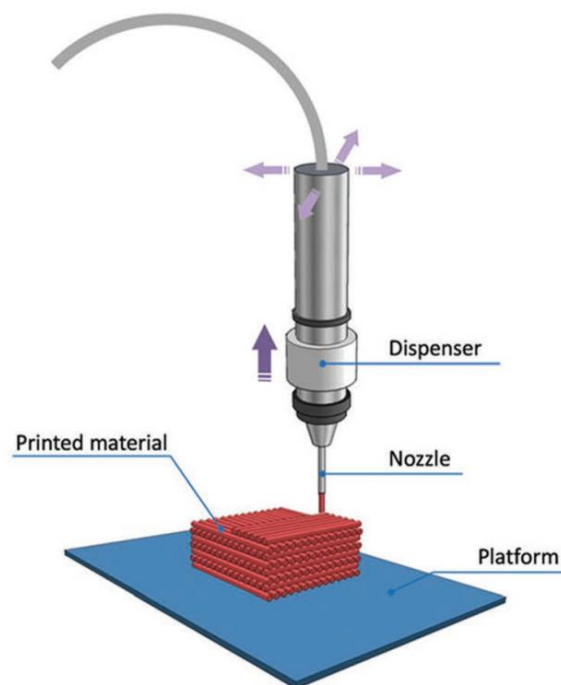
Schematic of the extrusion-type DIW printing system.³⁶
